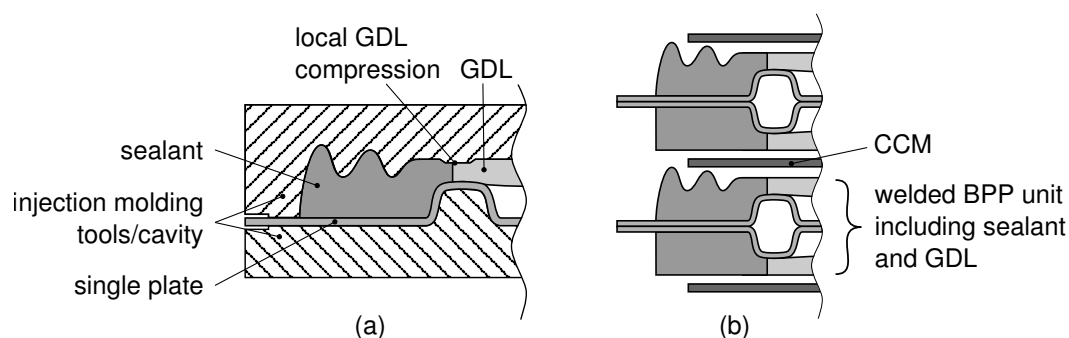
(a) Injection molding of a sealant on a single plate of a BPP whereby the GDL is integrally formed with the sealant. (b) Two single plates, each including sealant and GDL, joined to a BPP unit by laser welding, which can be assembled with CCMs to a stack in a subsequent assembly process.
